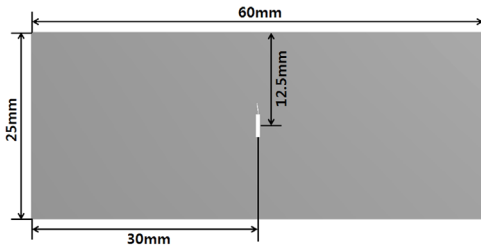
Dimensions of high tension steel plate specimen (Center crack only)
